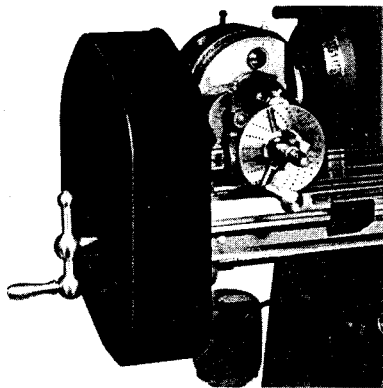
No. 0 Hinged Change Gear Guard encloses the headstock driving gears.
